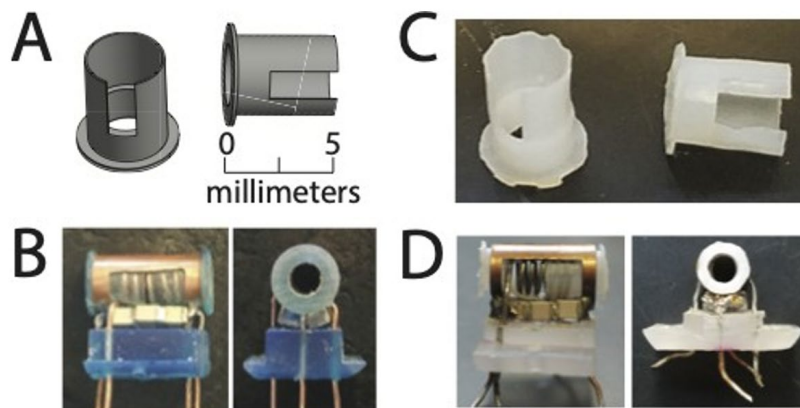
Inserts for application in a cross-coil MAS probe. A) CAD drawing of inserts to go in between a modified Alderman-Grant and variable-pitch solenoid in a cross-coil probe. B) 3D-printed pieces in a mock-up of the coil assembly to test dimensions and design application. C) 3D-printed PTFE inserts made in collaboration with 3M. D) Implementation of the 3D-printed PTFE inserts in the cross-coil MAS probe.
